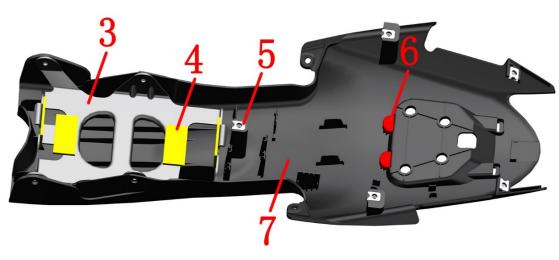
REAR COVER		Electrical device box component	СНК	(0)
